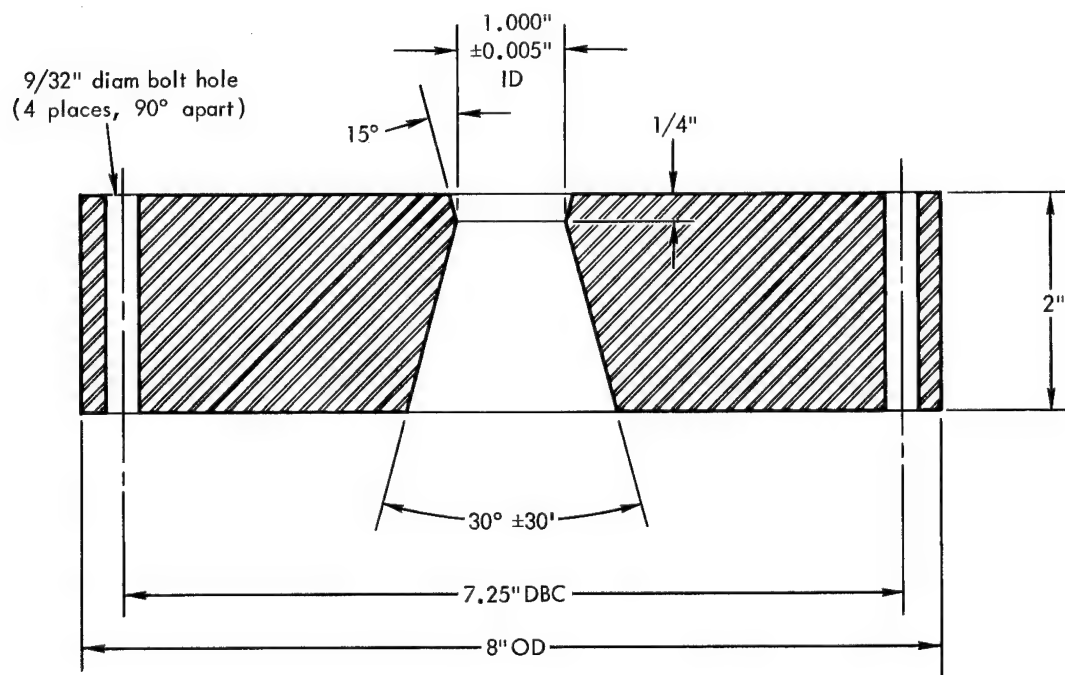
DOL Type II configuration mounting flange for 1-inch-diameter, 30° conical window exploratory tests.
